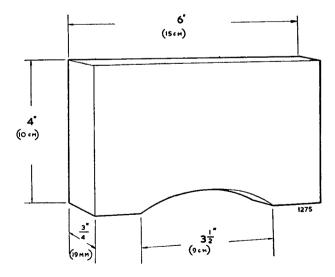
Showing a fibre block which can be made up and used to support the Upper Wishbone Levers when carrying out certain operations on the Front Suspension Assembly.
